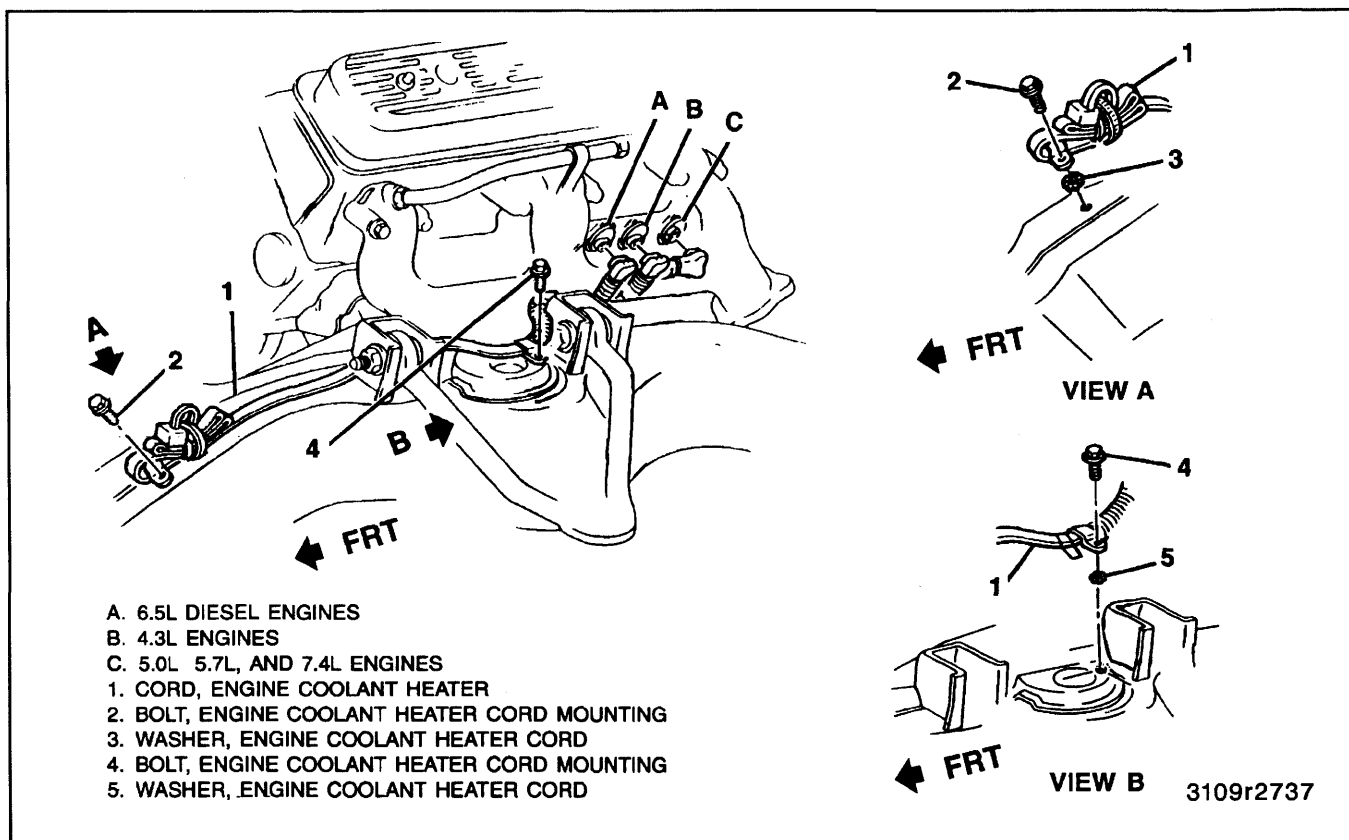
Engine Coolant Heater Cord Routing (Two-Wheel Drive Models)
